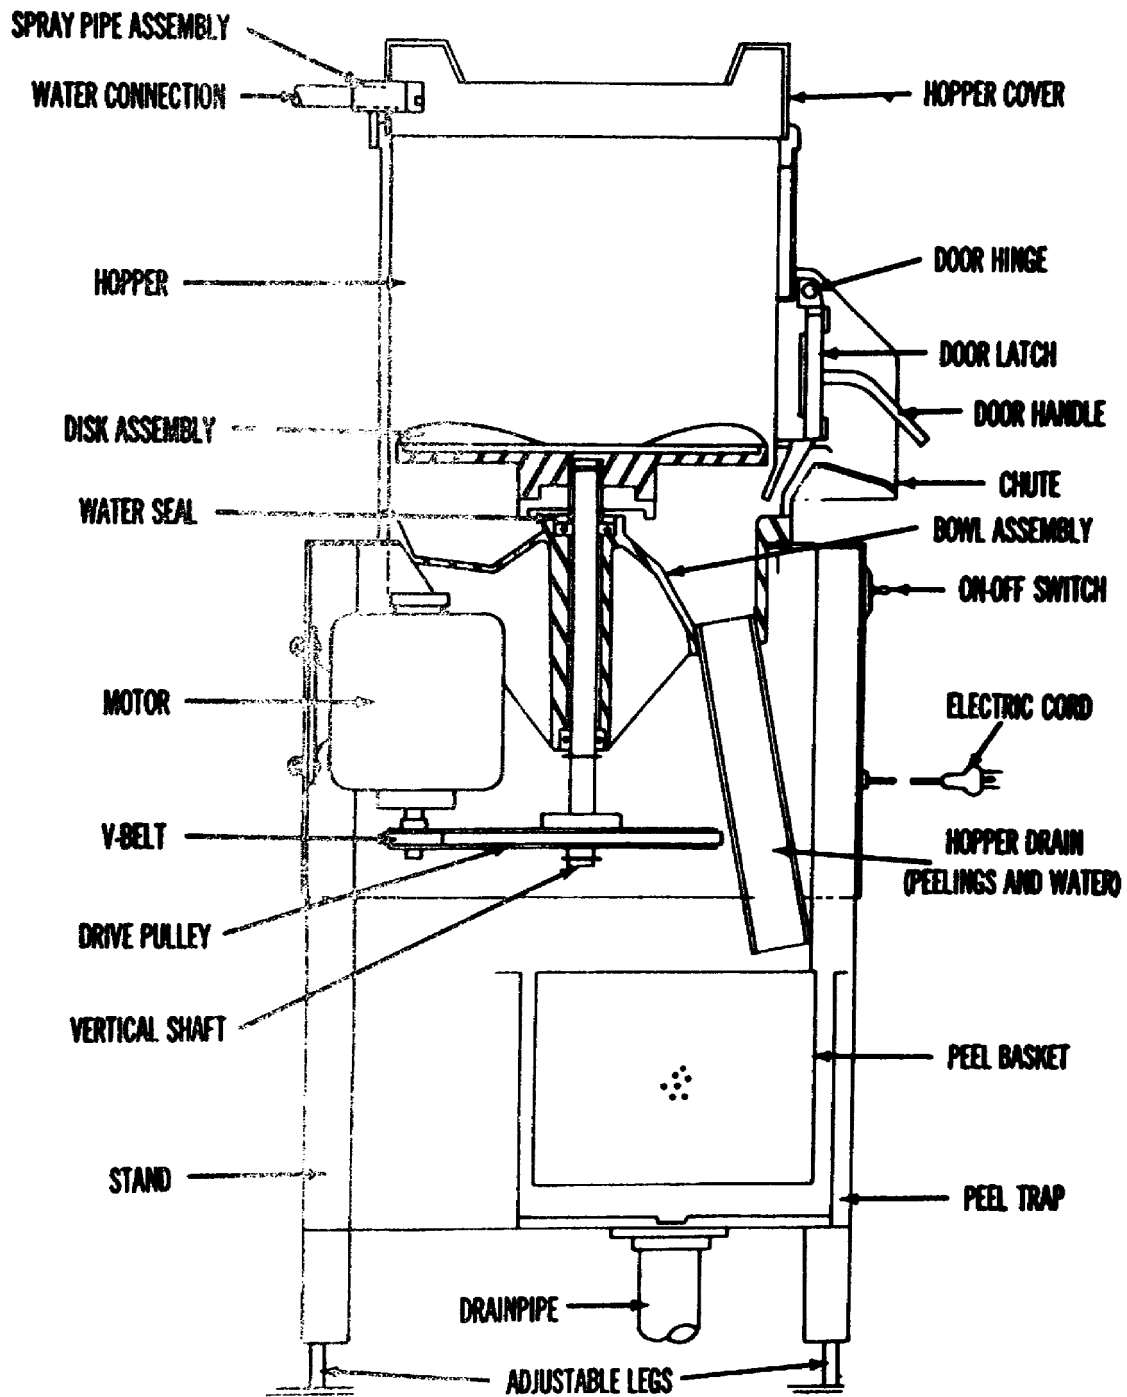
Cutaway diagram of the vegetable-peeling machine.
